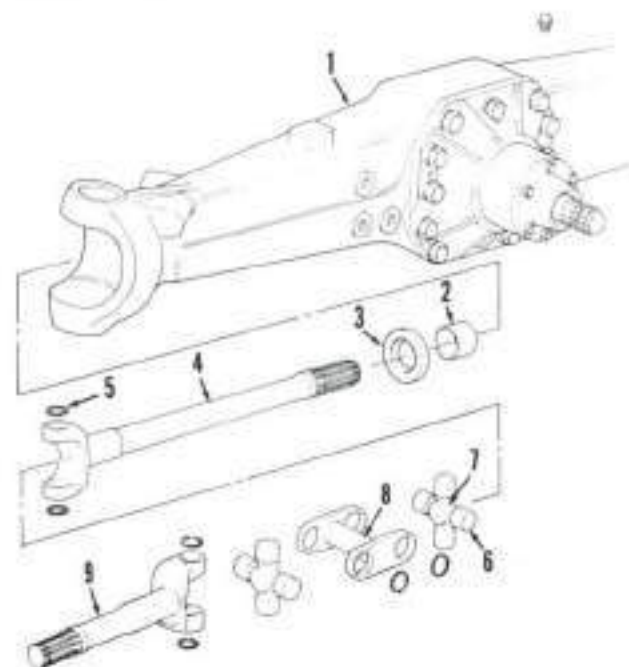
Exploded view of Carraro Type 700/19 front drive axle limited slip differential assembly.
